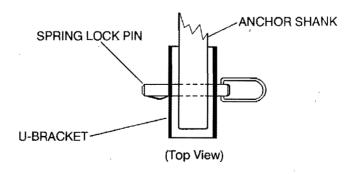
• BOW PULPIT U-BRACKET & SPRING LOCK PIN
